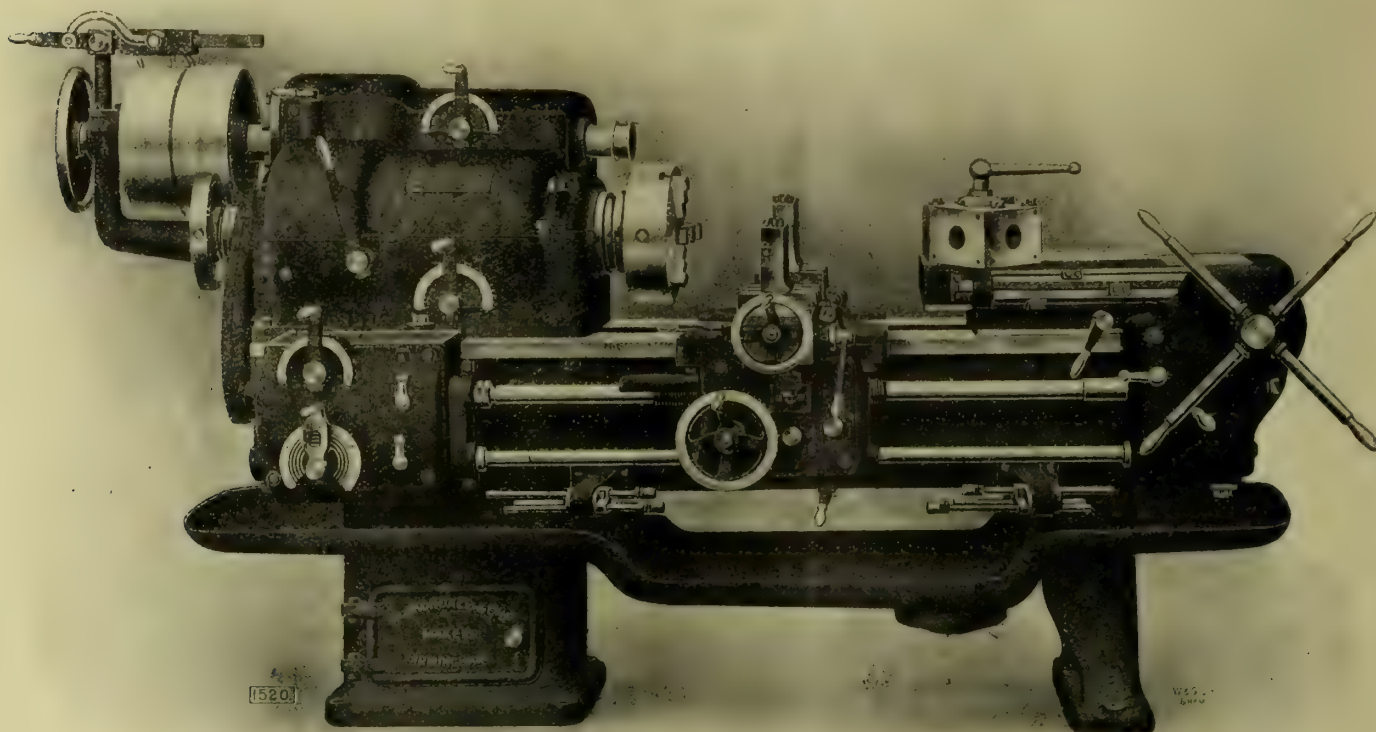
HIGH-SPEED 9IN. CENTRE CAPSTAN LATHE. MESSRS. JAMES ARCHDALE & CO., LTD., BIRMINGHAM.
